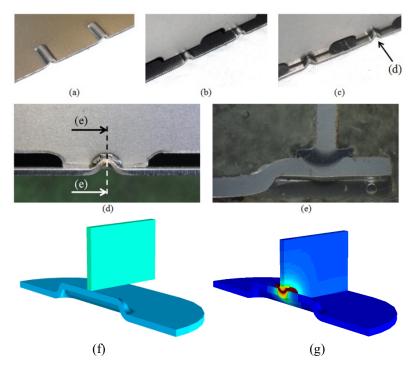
Projection welding of vertical sheet to sheet with long embossment simulated by SORPAS 3D.
